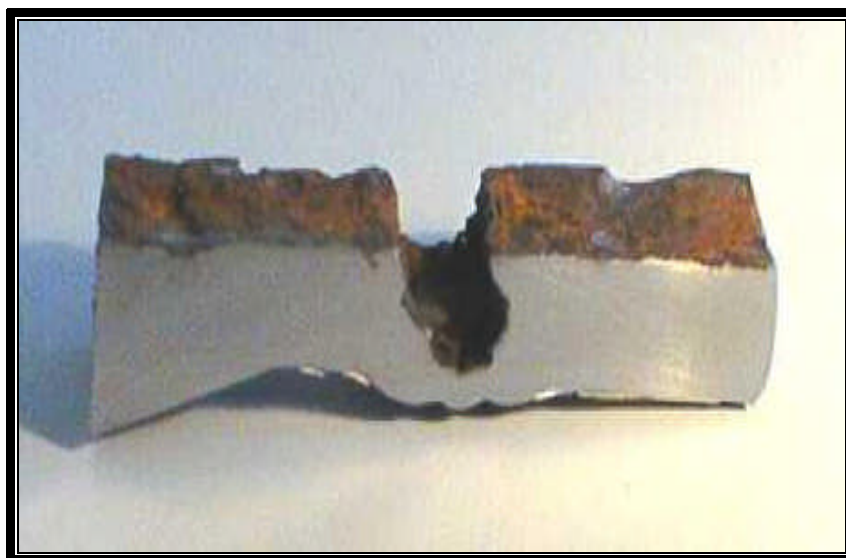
Preferential weld attack of 1% nickel weld consumable [6]
